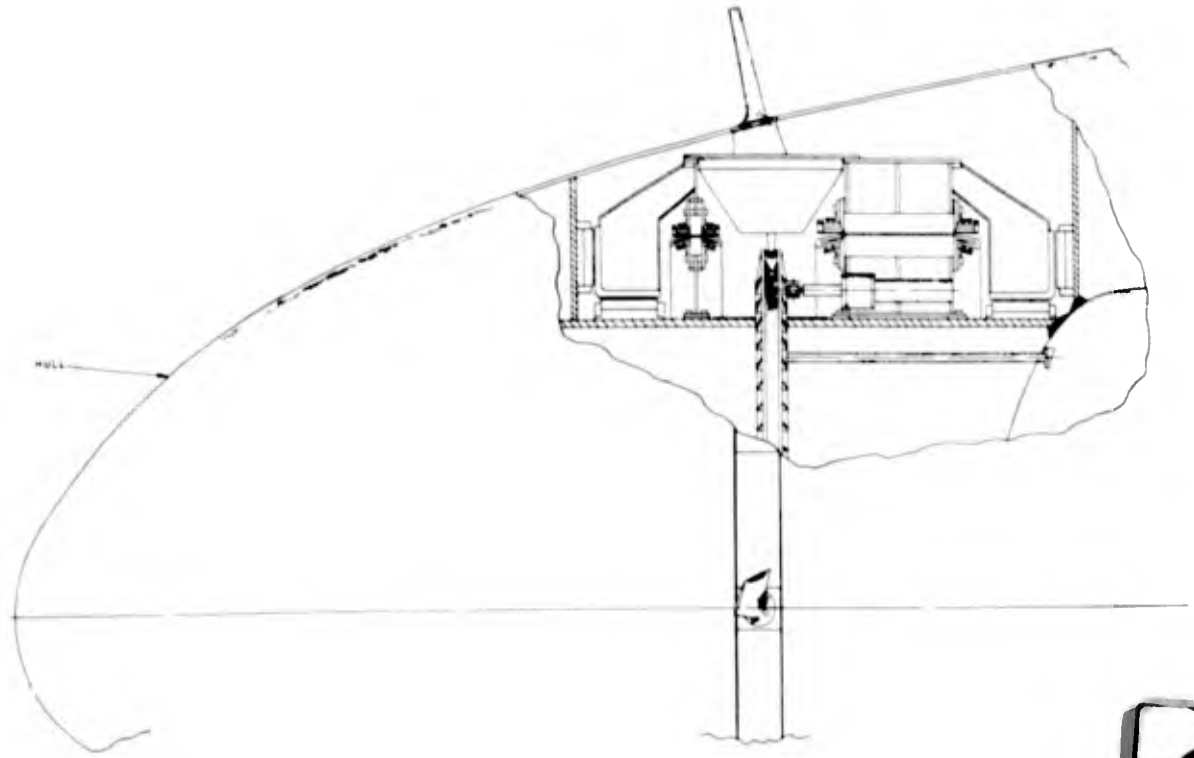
Stationary Wobble Plate, Sector and Bevel Gear Drive
